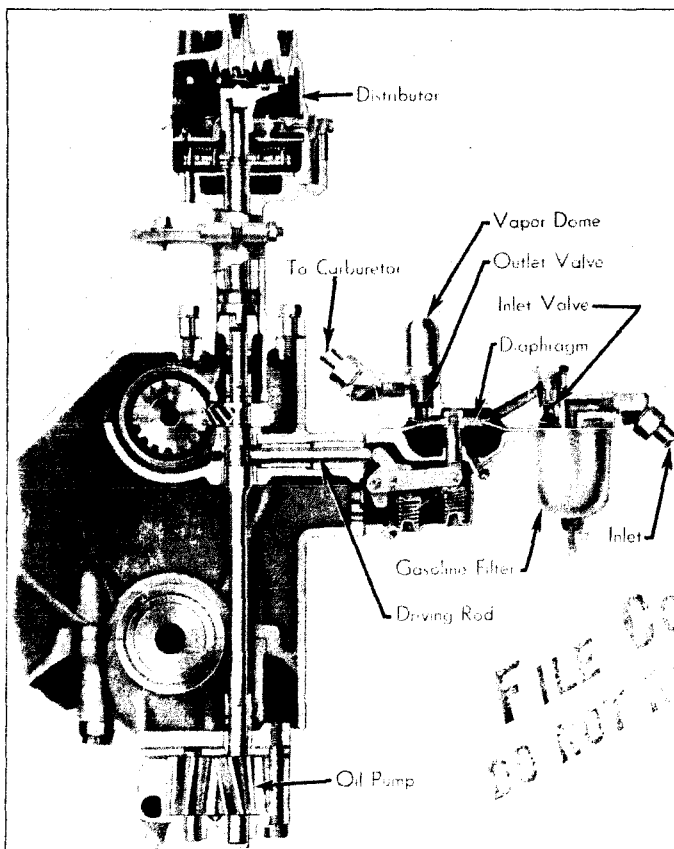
The fuel pump is operated by a cam on the distributor shaft
